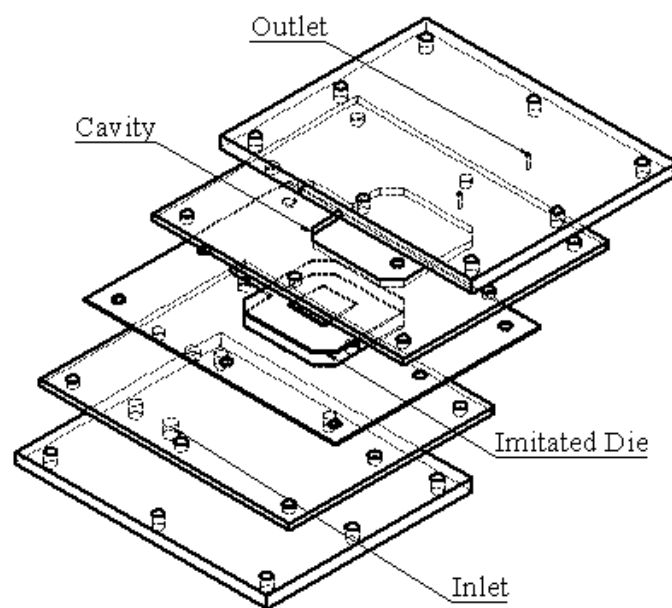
Exploded views of the mould of scale-up eight-wire PBGA model with centre inlet (Layer 1: top plate, Layer 2: cavity plate, Layer 3 - 5 base plates with inlet).
